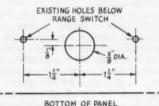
Location of mounting hole for r.f. output connector (J₃) from signal generator.
